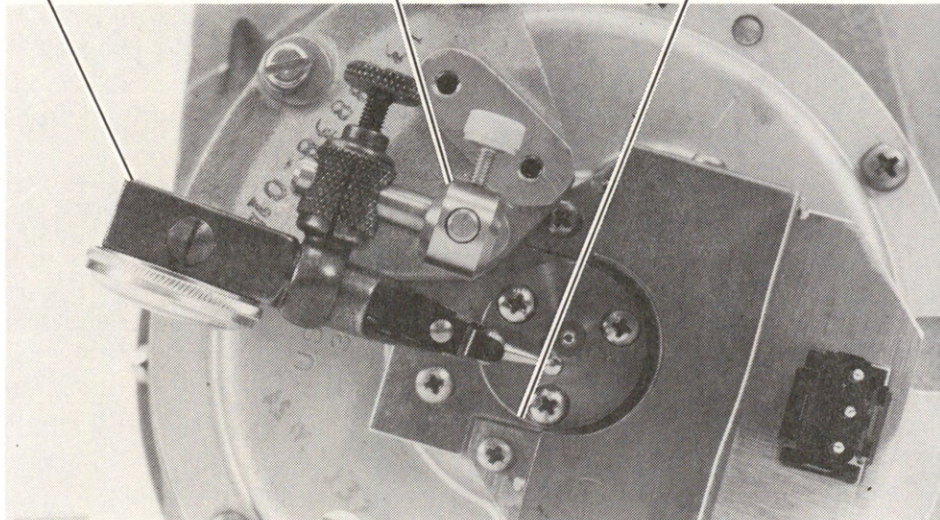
Dial Indicator and Support Mounted on Scanner
